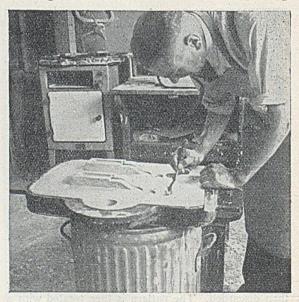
Any Gating System required is at this stage cut into the Plaster Half-moulds, but a better way is to incorporate Wooden Runner Patterns.
